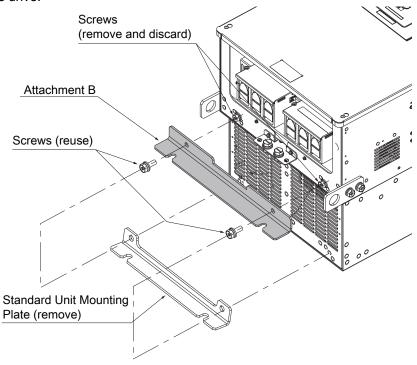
Remove Bottom Mounting Plate and Attach Attachment B
